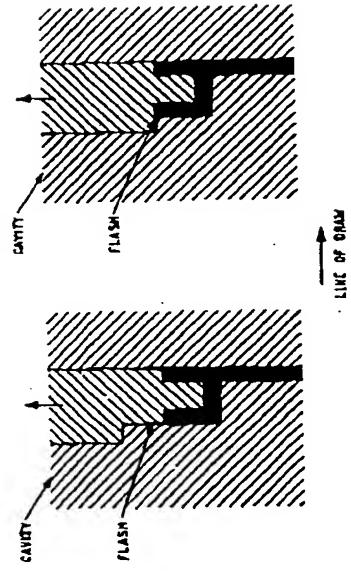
Fitting of side elements should be such that if flash occurs, it is in line of draw: (a) undesirable design; (b) preferred design
